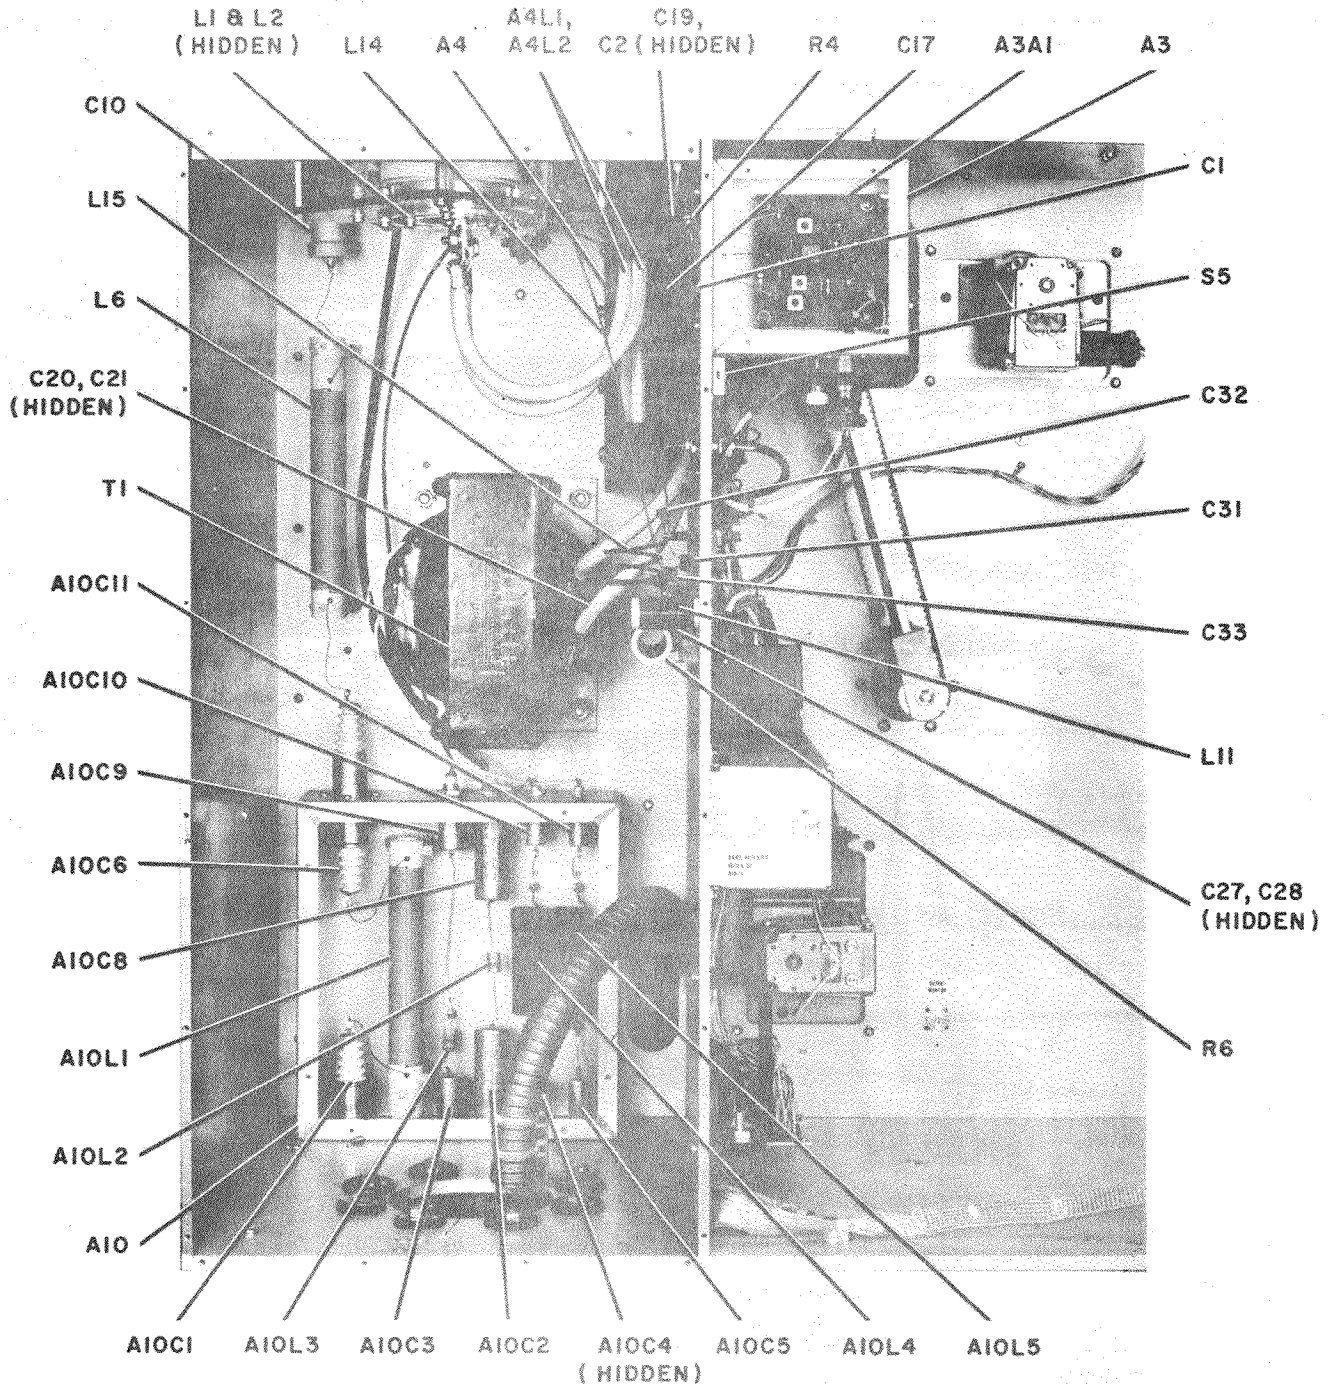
10 KW PA, Chassis Assembly 9A1, Front Center View, Component Locations
